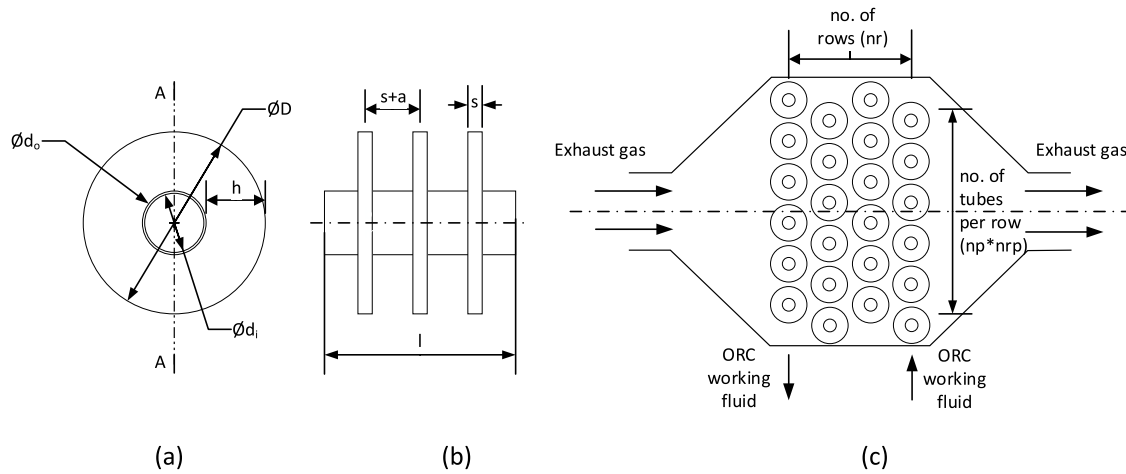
Geometry of the fin-and-tube evaporator: (a) tube and fin cross section, (b) tube axial view and (c) fluid arrangement (Carraro et al., 2021).
